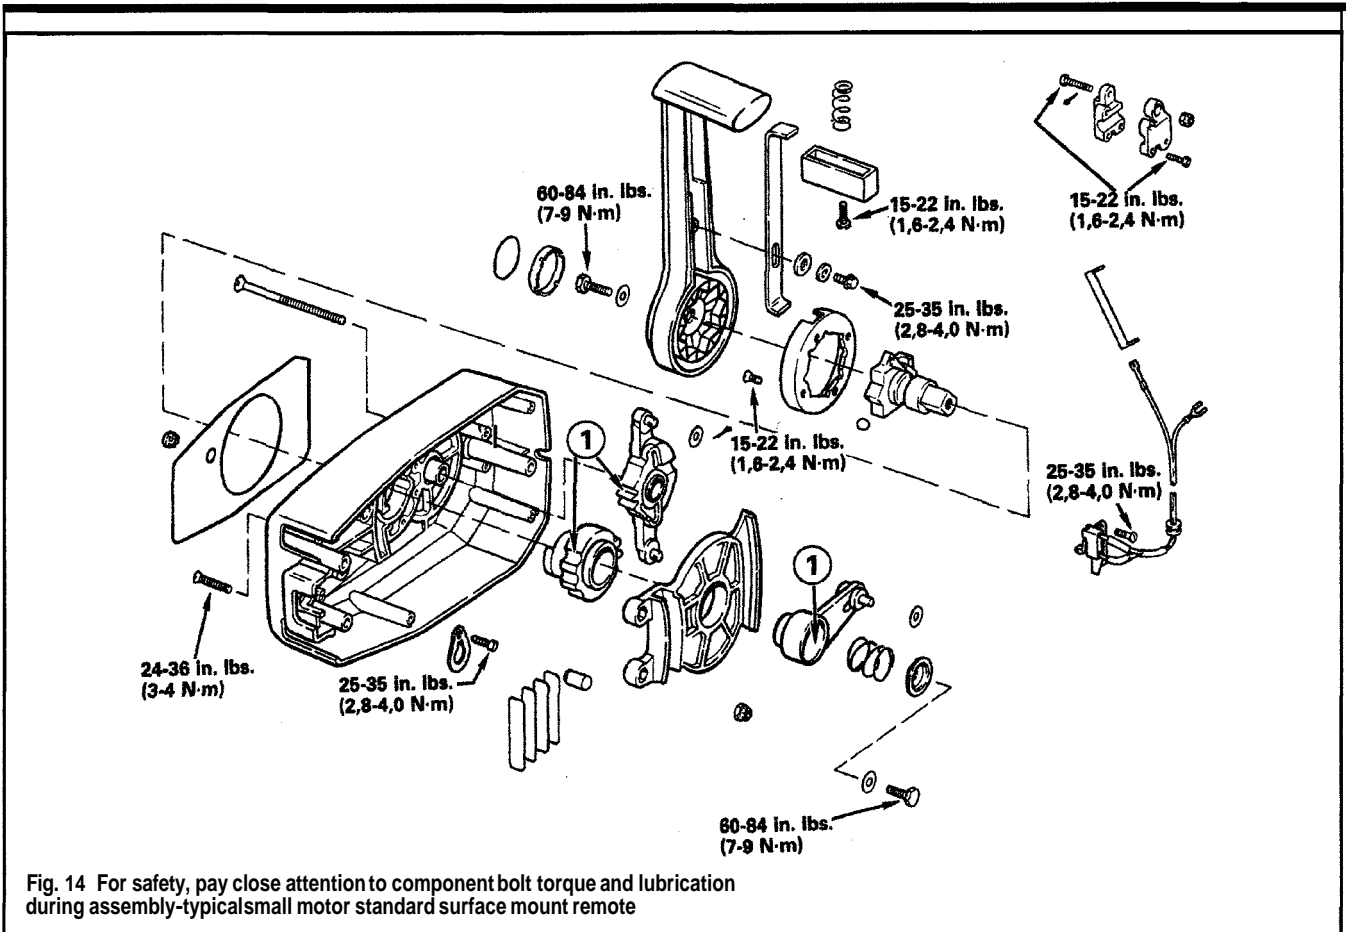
For safety, pay close attention to component bolt torque and lubrication during assembly-typical small motor standard surface mount remote
